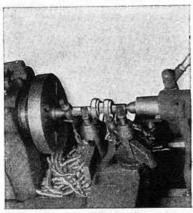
Two Tool Posts in Use on 11-inch Lathe
